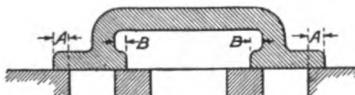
Section of Slide Valve, Showing Steam and Exhaust Laps
